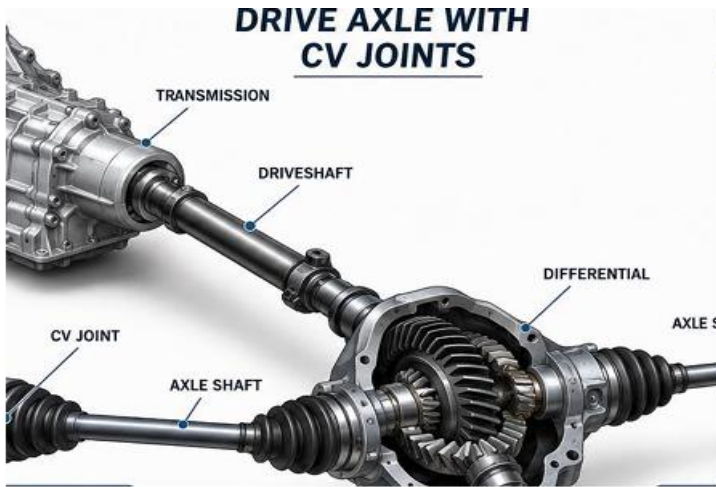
Single Propeller Shaft CVJ Assembly Details
